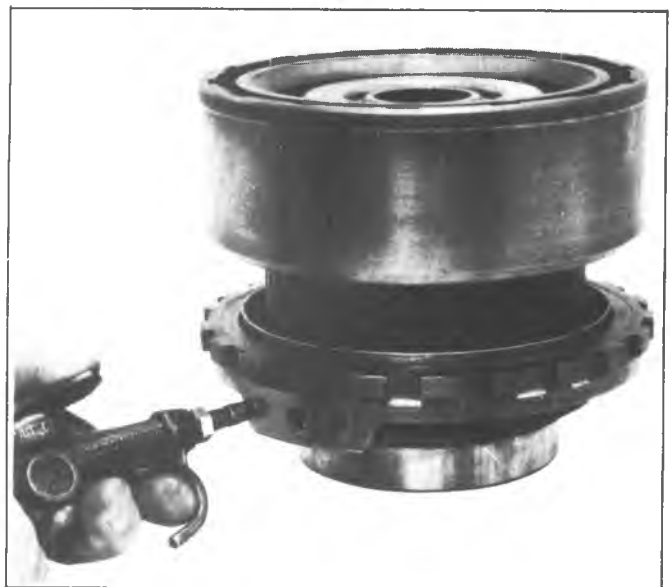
A-111C--Air Checking Direct Clutch Assembly
